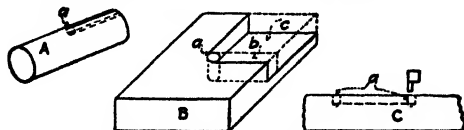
In *A*, the diameter of the drilled hole (*a*) equals the width of the keyway. In such a job as *B*, first drill a hole at (*a*), say $\frac{1}{4}$ in. in diameter; next, machine the slot (*b*); then machine the remainder (*c*), the cut ending in slot (*b*). Such a job as *C*, requires a drilled hole at the beginning and also at the end of the keyway. Keyways such as those shown in *A* and *C* are cut more easily in the milling machine, but occasionally must be cut in the shaper or the planer.
